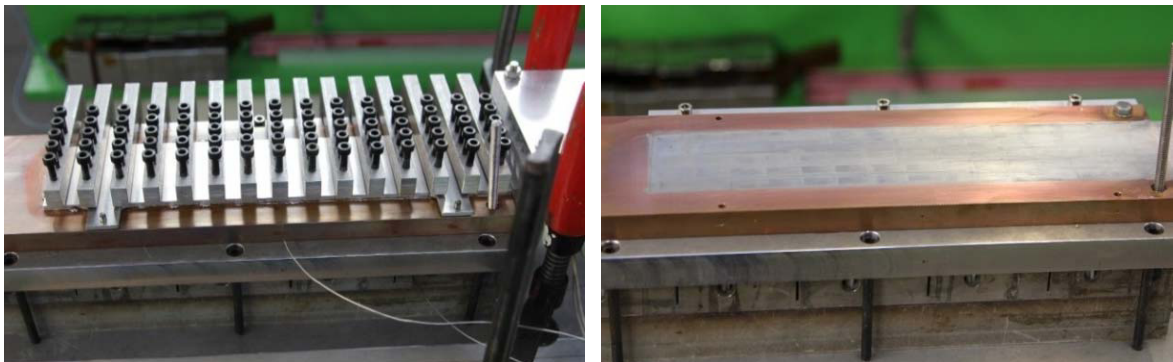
Stacks of RE-123 coated conductors after soldering to the copper end piece on the transformer side with stacks still clamped in position (left) and after removal of the clamping unit and of excess solder (right).
